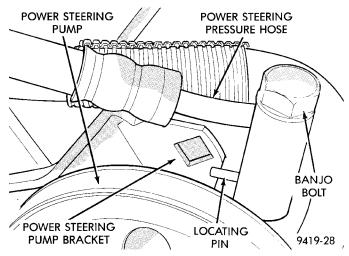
Power Steering Hose Attachment To Power Steering Pump
